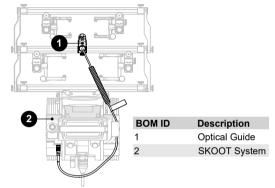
Optical Guide mounted to a vertical probe holder frame
